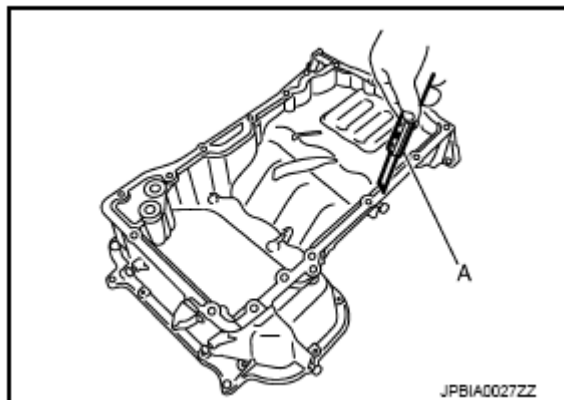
Removing Old Liquid Gasket From Mating Surfaces Using Scraper
